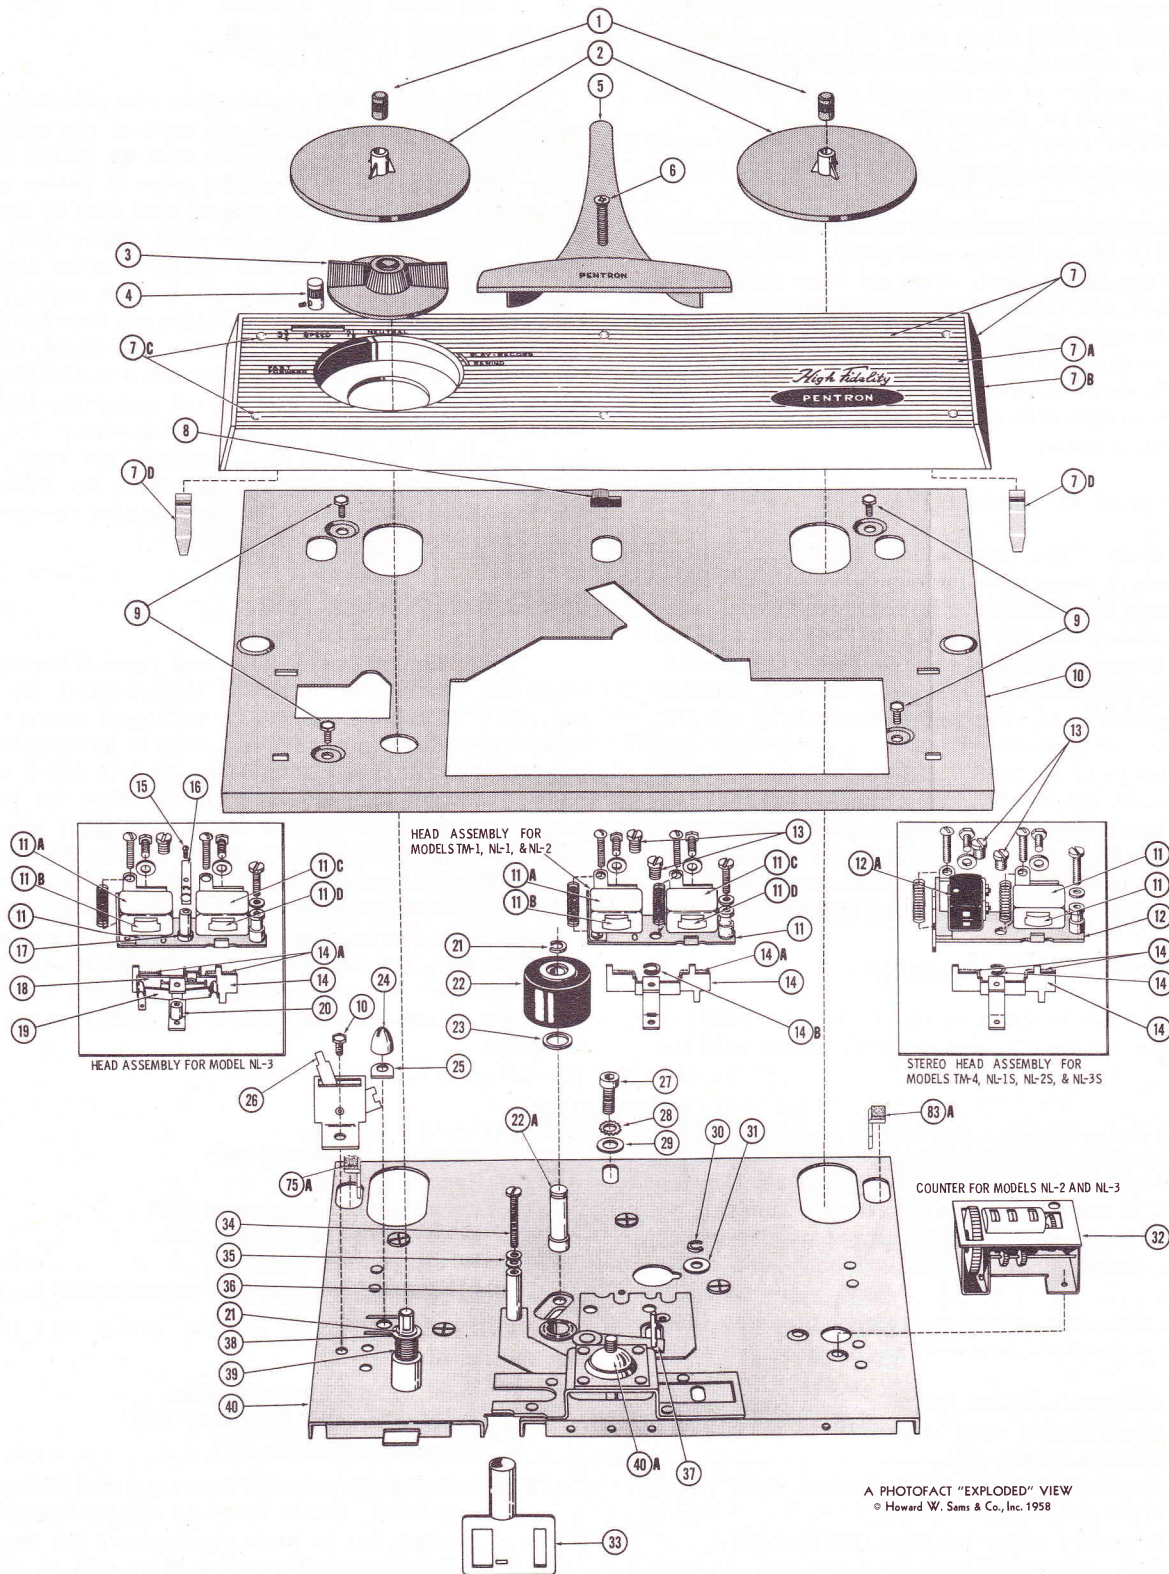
A. Exploded View Of Parts Above Mechanism Plate
